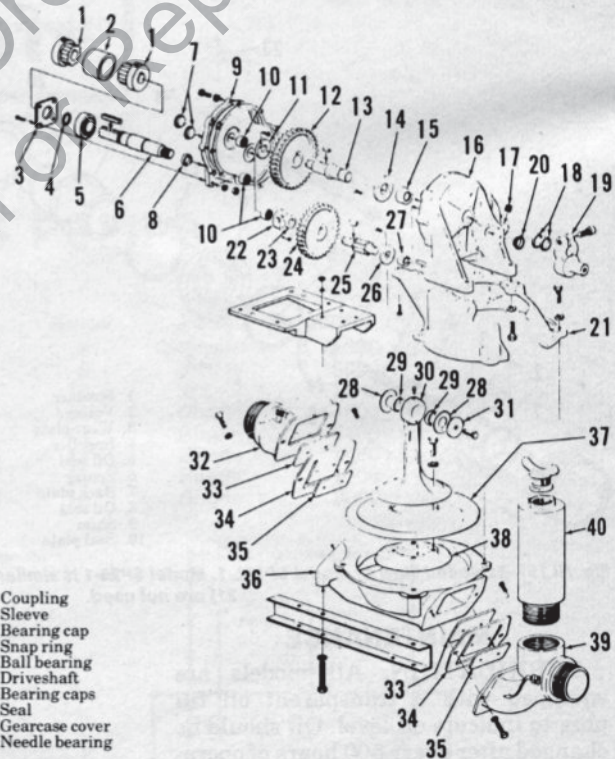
Exploded view of model DP3-1A diaphragm pump. Model 111DP3-1 is similar.
